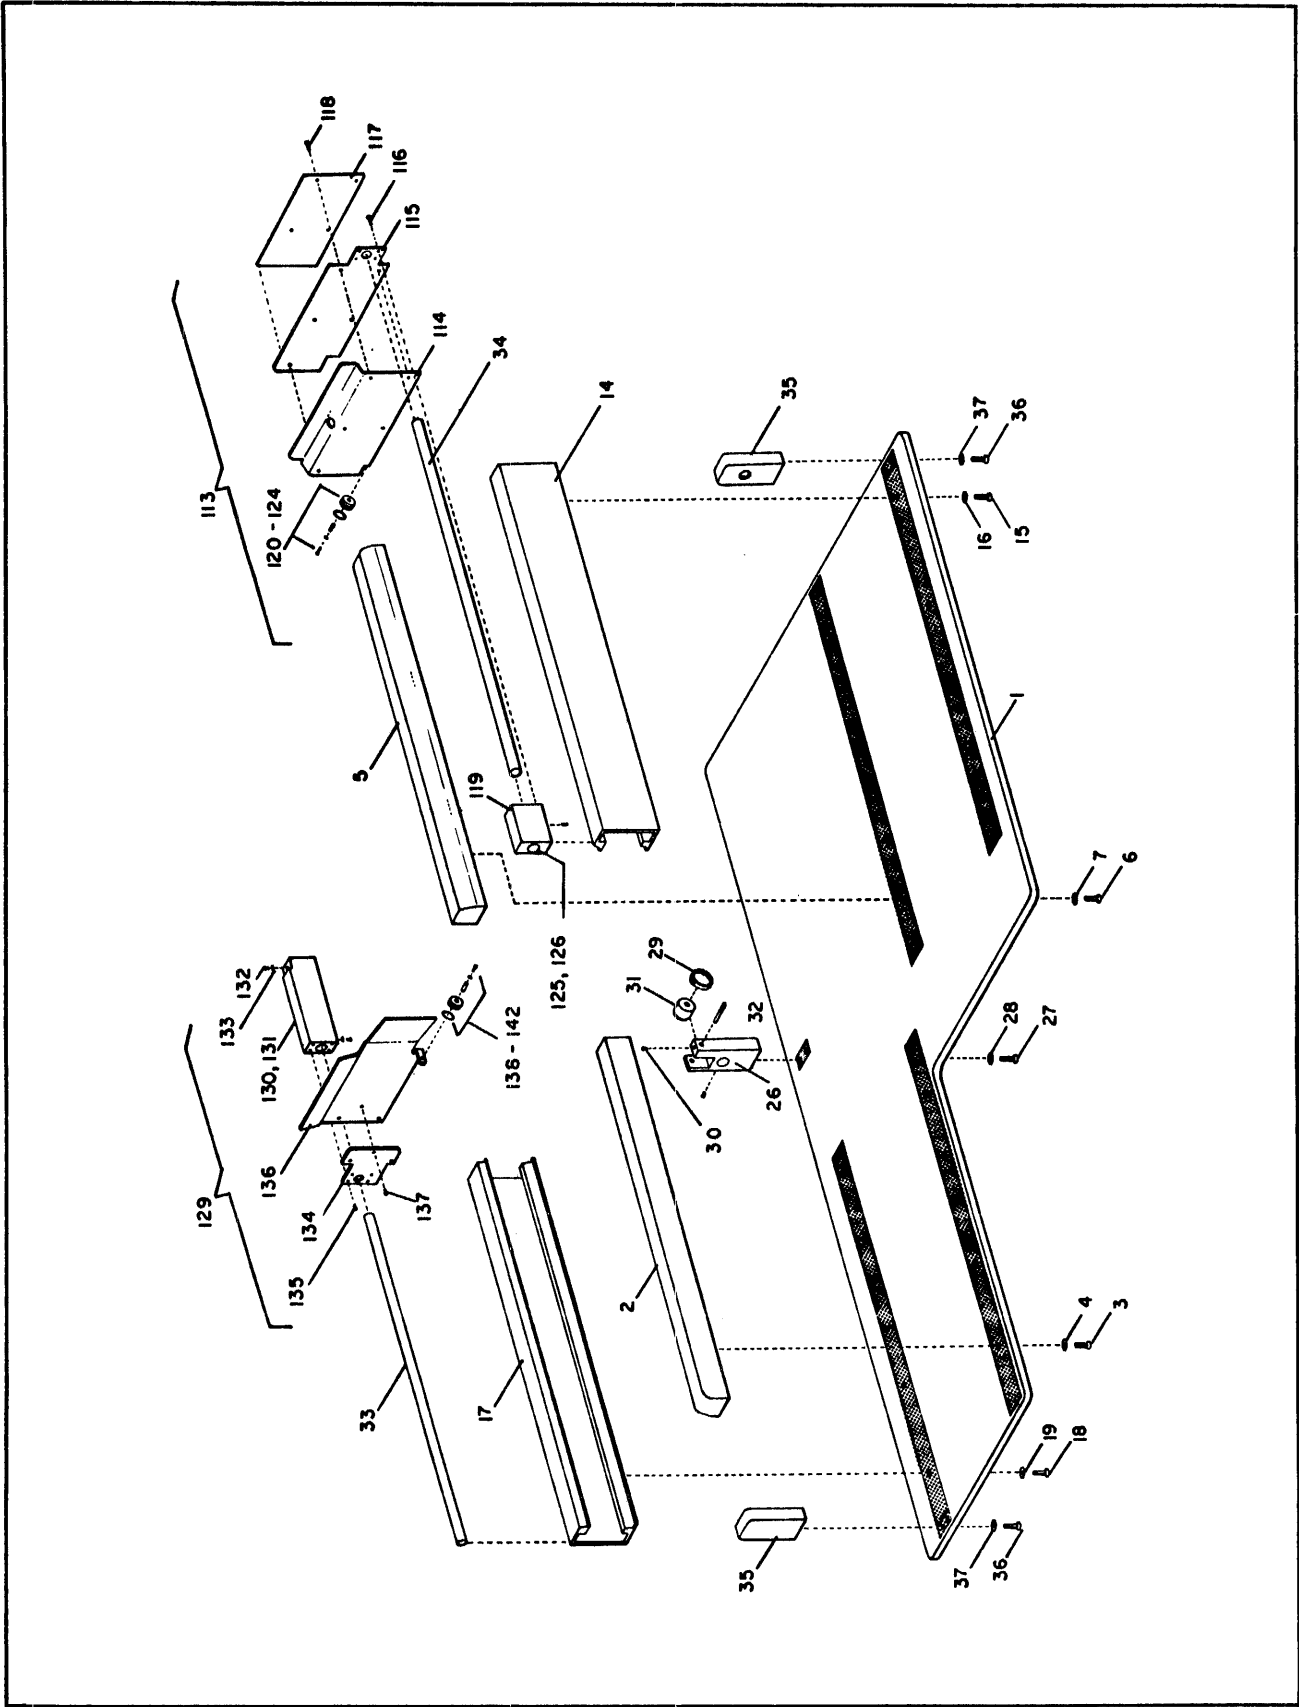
TOP PLATE ASSEMBLY (sheet 1 of 4)
